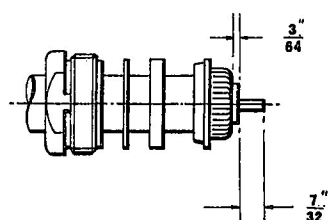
A—Assembly instructions—C Type plugs and sockets—Improved braid clamp
